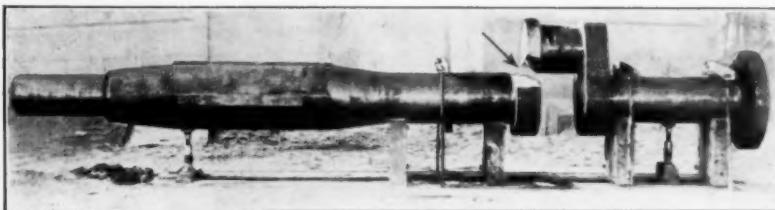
FRACTURE IN 14-IN. CRANKSHAFT OF BINGHAMTON RAILWAY COMPANY, BINGHAMTON, N. Y., CUT OUT FOR THERMIT REPAIR
